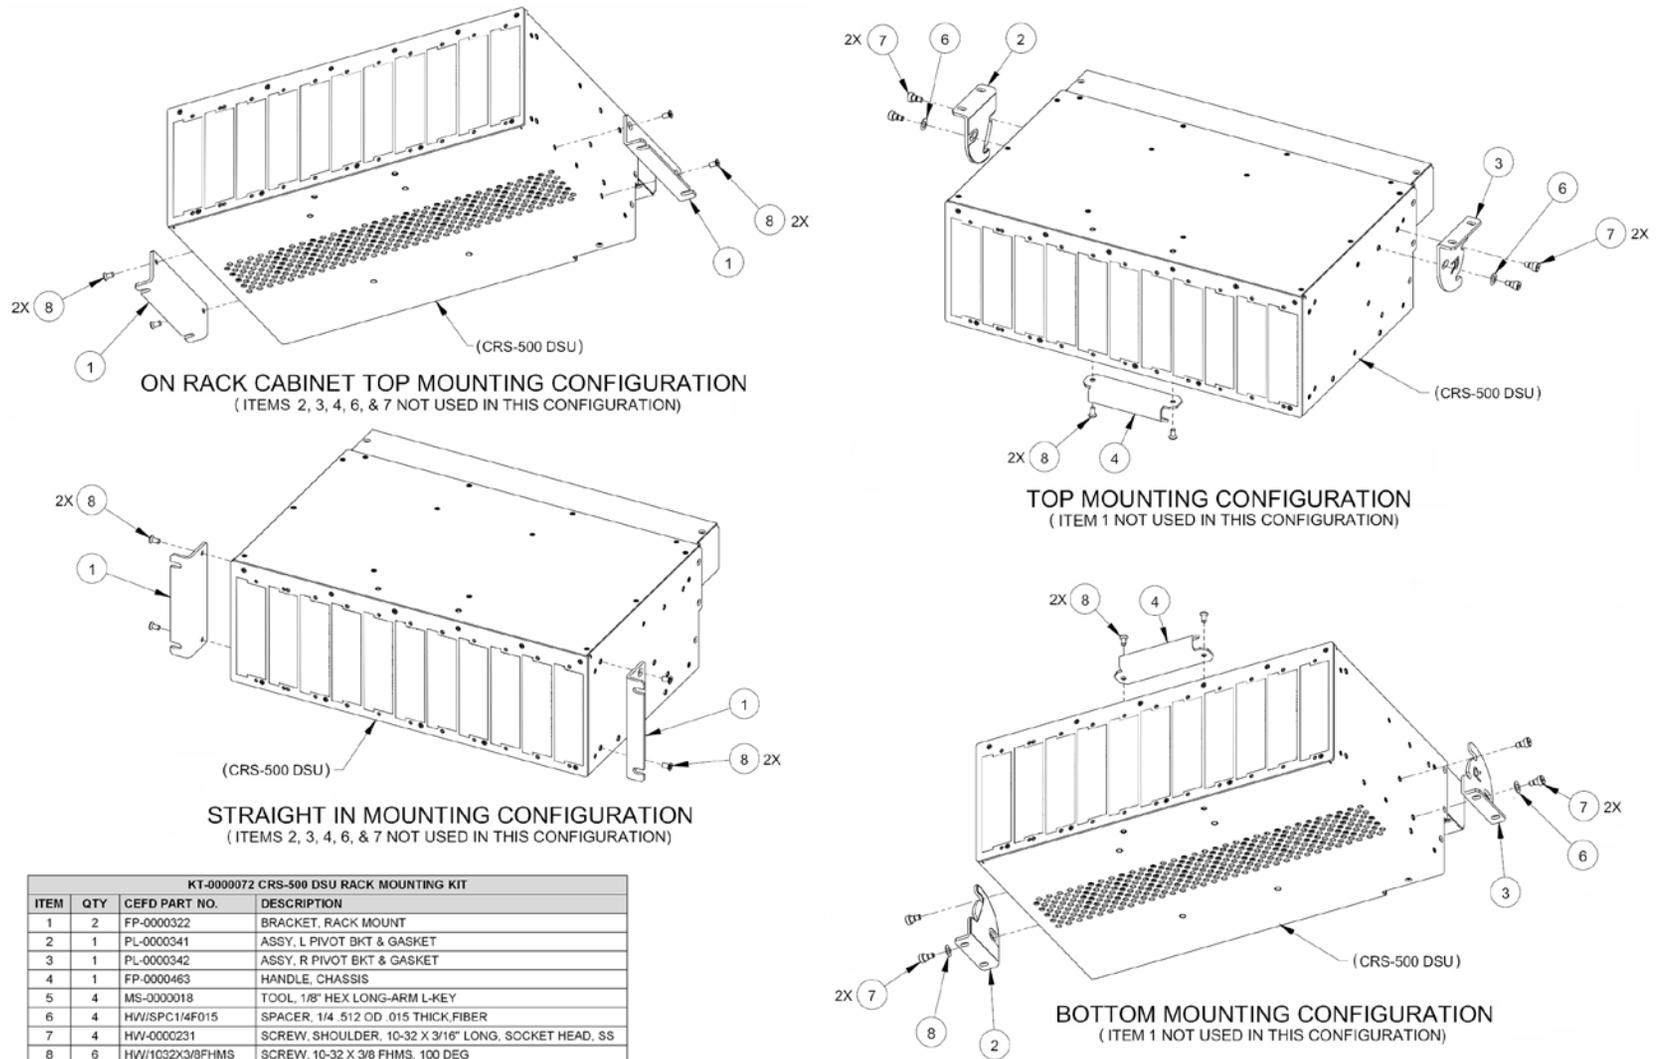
CRS-500 Optional DSU Rack Mounting Kit KT-0000072
